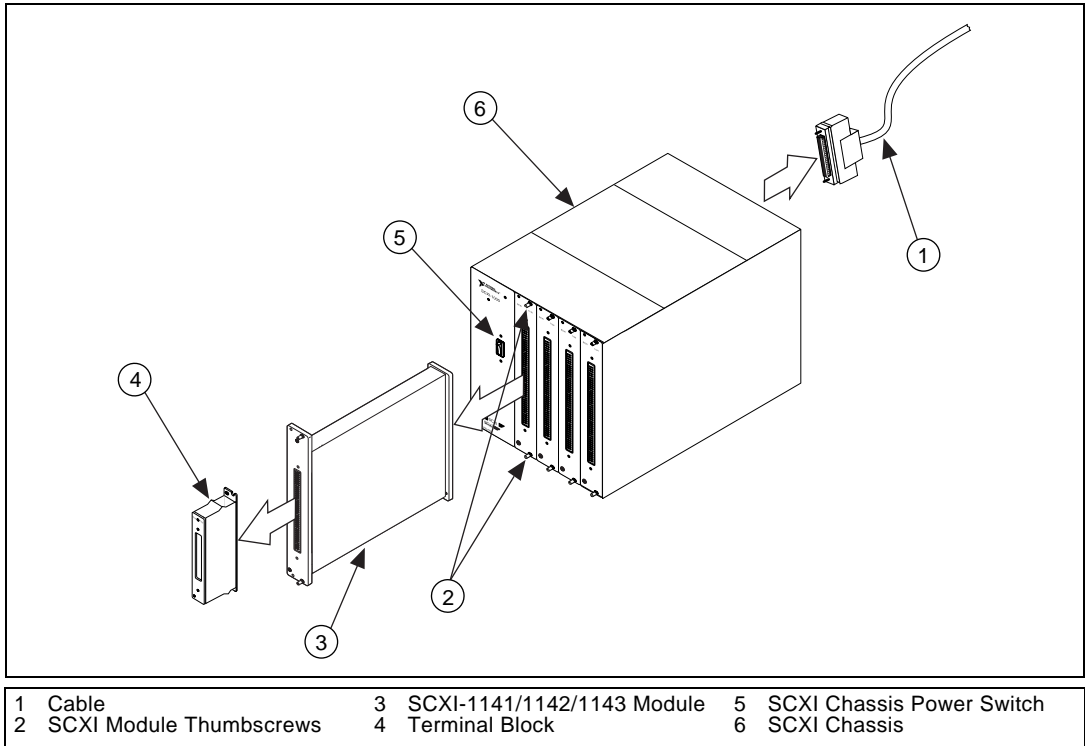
Removing the SCXI-1141/1142/1143 Module
